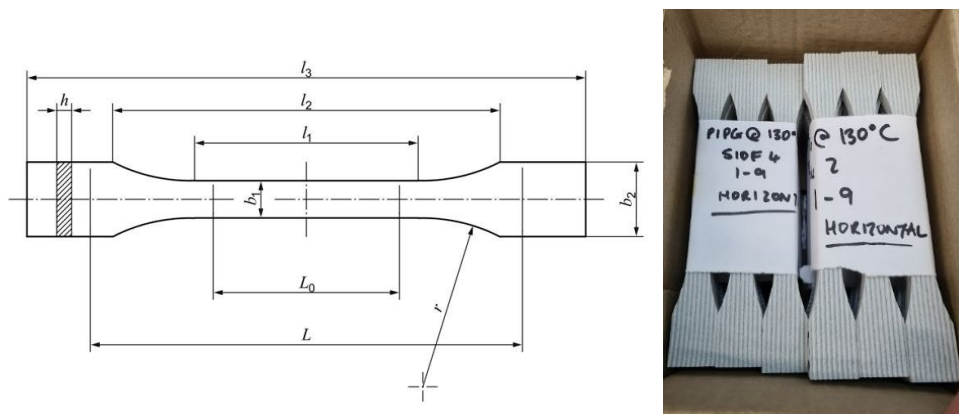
Left: ISO 527-2 1B standard, with dimensions explained in Table 1. Right: A set of Horizontal (X) dog-bone specimens after cutting with a waterjet cutter. Figure by authors.
